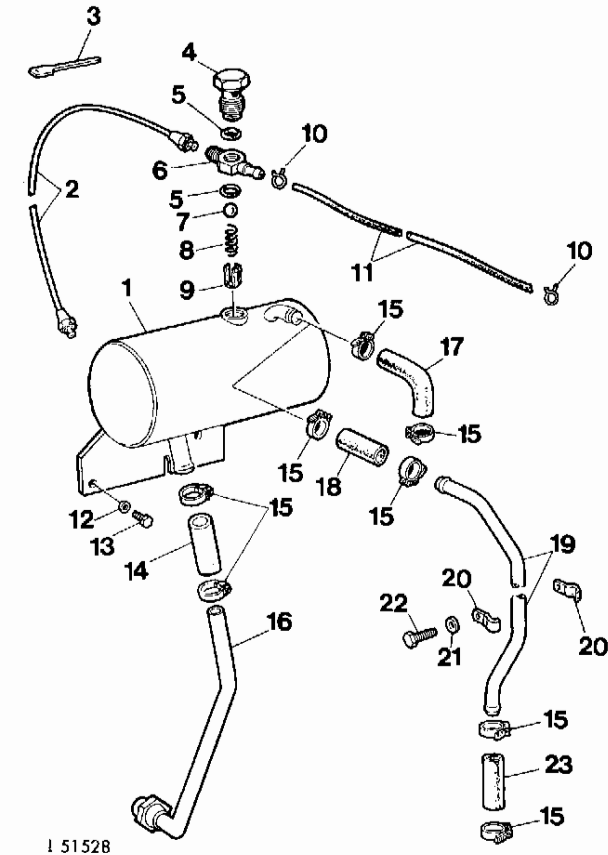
Exploded View of Hydraulic Oil Reservoir
